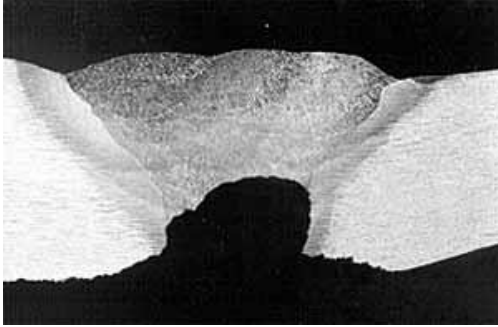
Weld metal corrosion in carbon steel [4].
